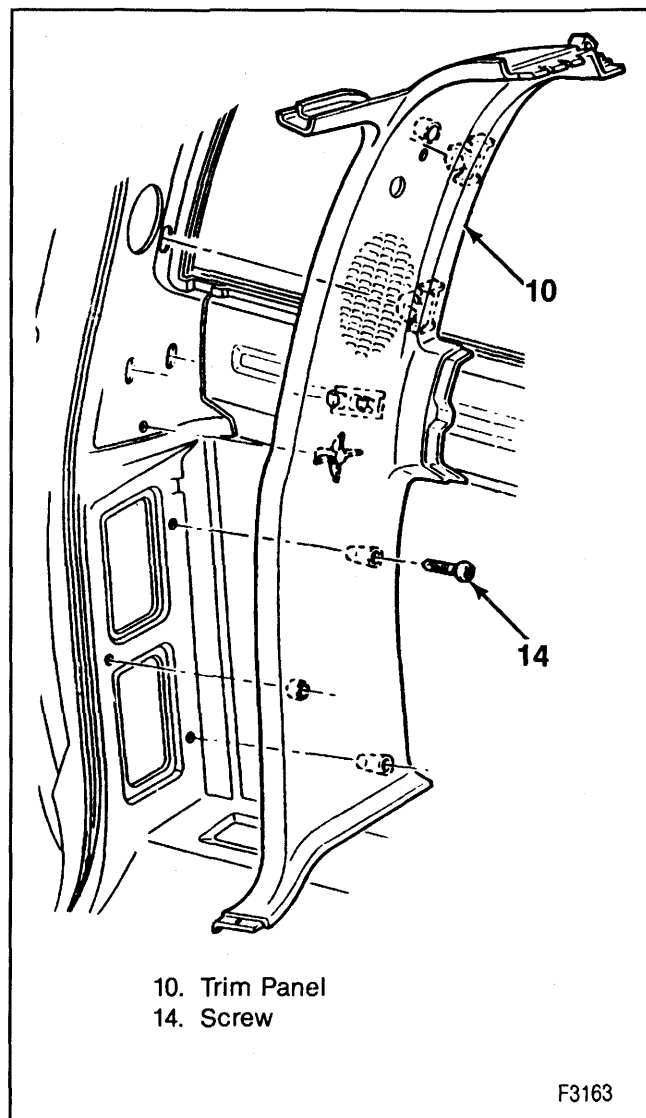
Body Side Trim Panel (Regular and Crew Cab)
